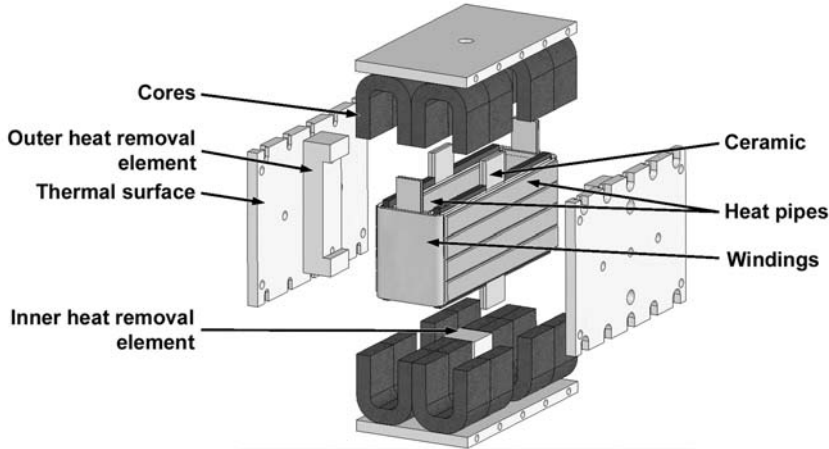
3D exploded view of transformer structure of Prototype II and further
